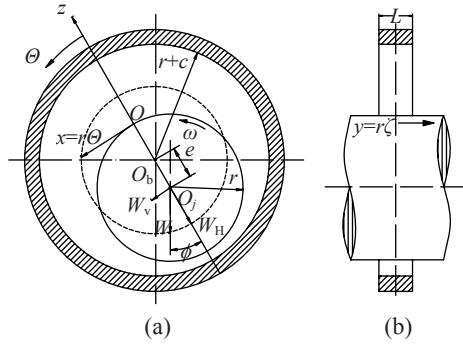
Schematic diagram of self-acting gas-lubricated journal bearings. (a) Cross section; (b) Axial section
